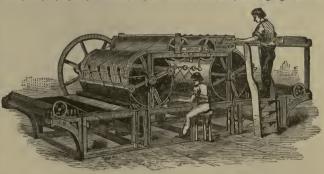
COWPER AND APPLEGATH'S DOUBLE CYLINDER MACHINE.
